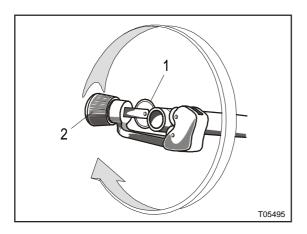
Tighten cutter wheel (1) by turning handle (2)
